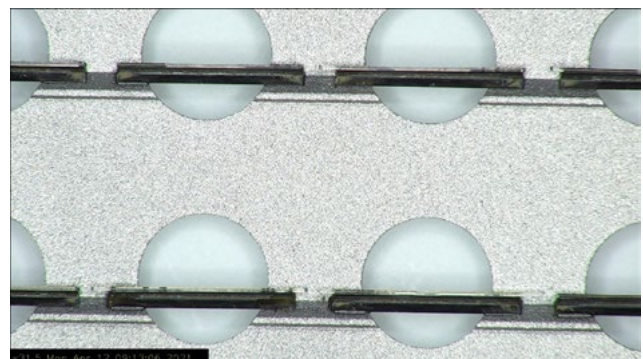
An optical image of the completed assembly mount showing the three parts of the completed target
